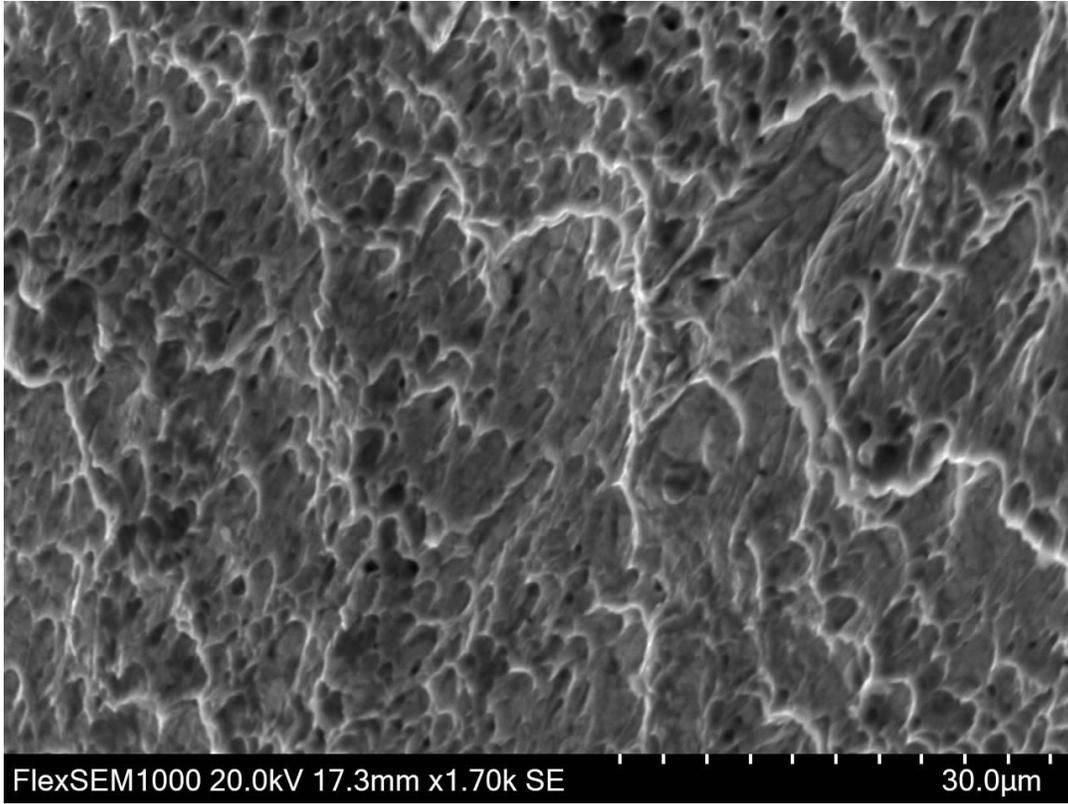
SHEARED DIMPLES OBSERVED IN THE POCKET IN FIGURE 51
